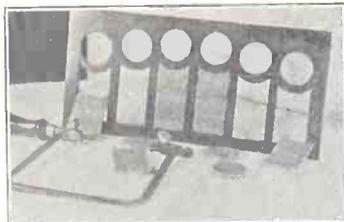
The grill is cut out by using a scroll saw. Thin silk is pasted on the reverse side of this to cover the loud speaker in the finished machine and to make a neat appearance.
